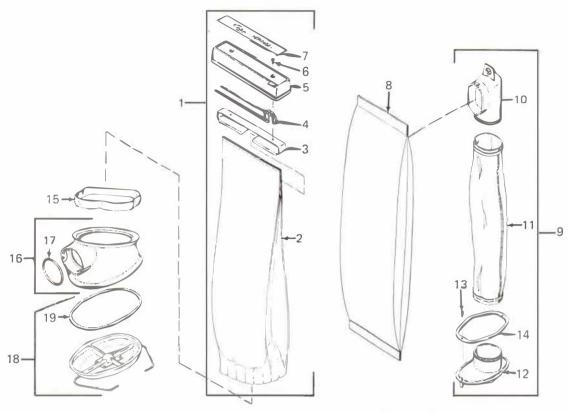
HERITAGE Sani-Em-Tor and bag group, with disposable bag, exploded view
